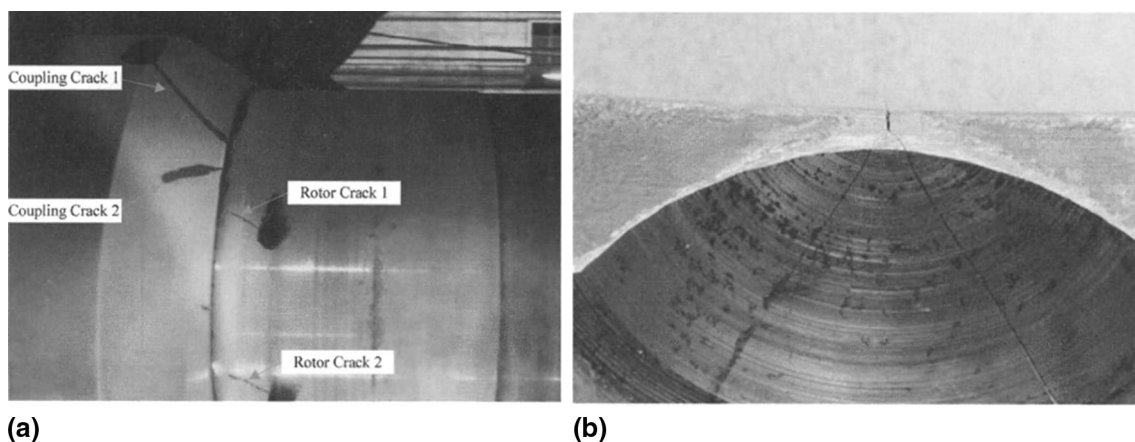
Fatigue fracture failure in a shaft and coupling of high-power generator. “Coupled torsional vibration and fatigue damage of Turbine Generator Due to Gird Disturbance.” Chao Liu y Col. Beijing, China. 2014
